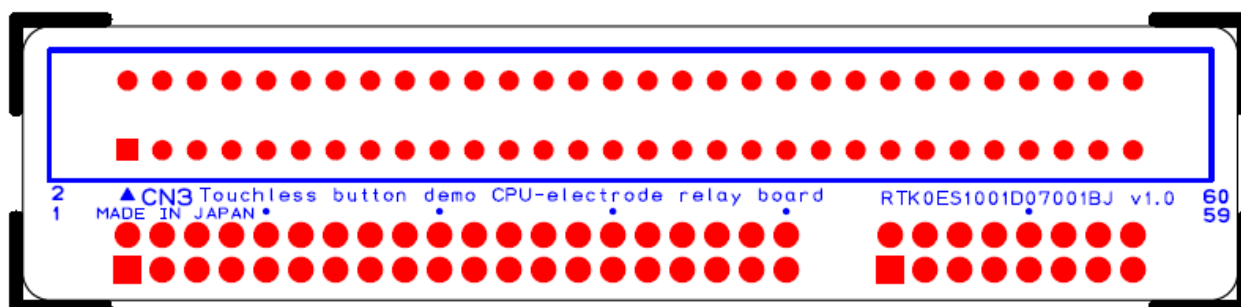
CPU-Electrode relay board: Component Side Silkscreen
